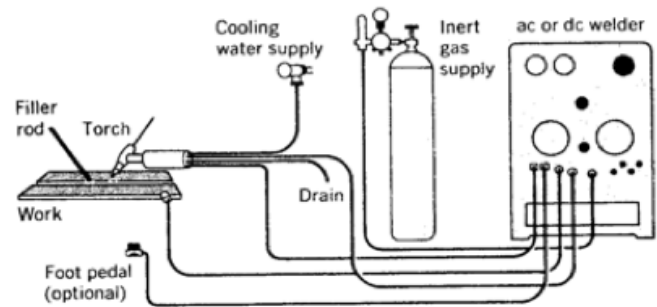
Gas Tungsten-Arc Welding, GTAW [26]
